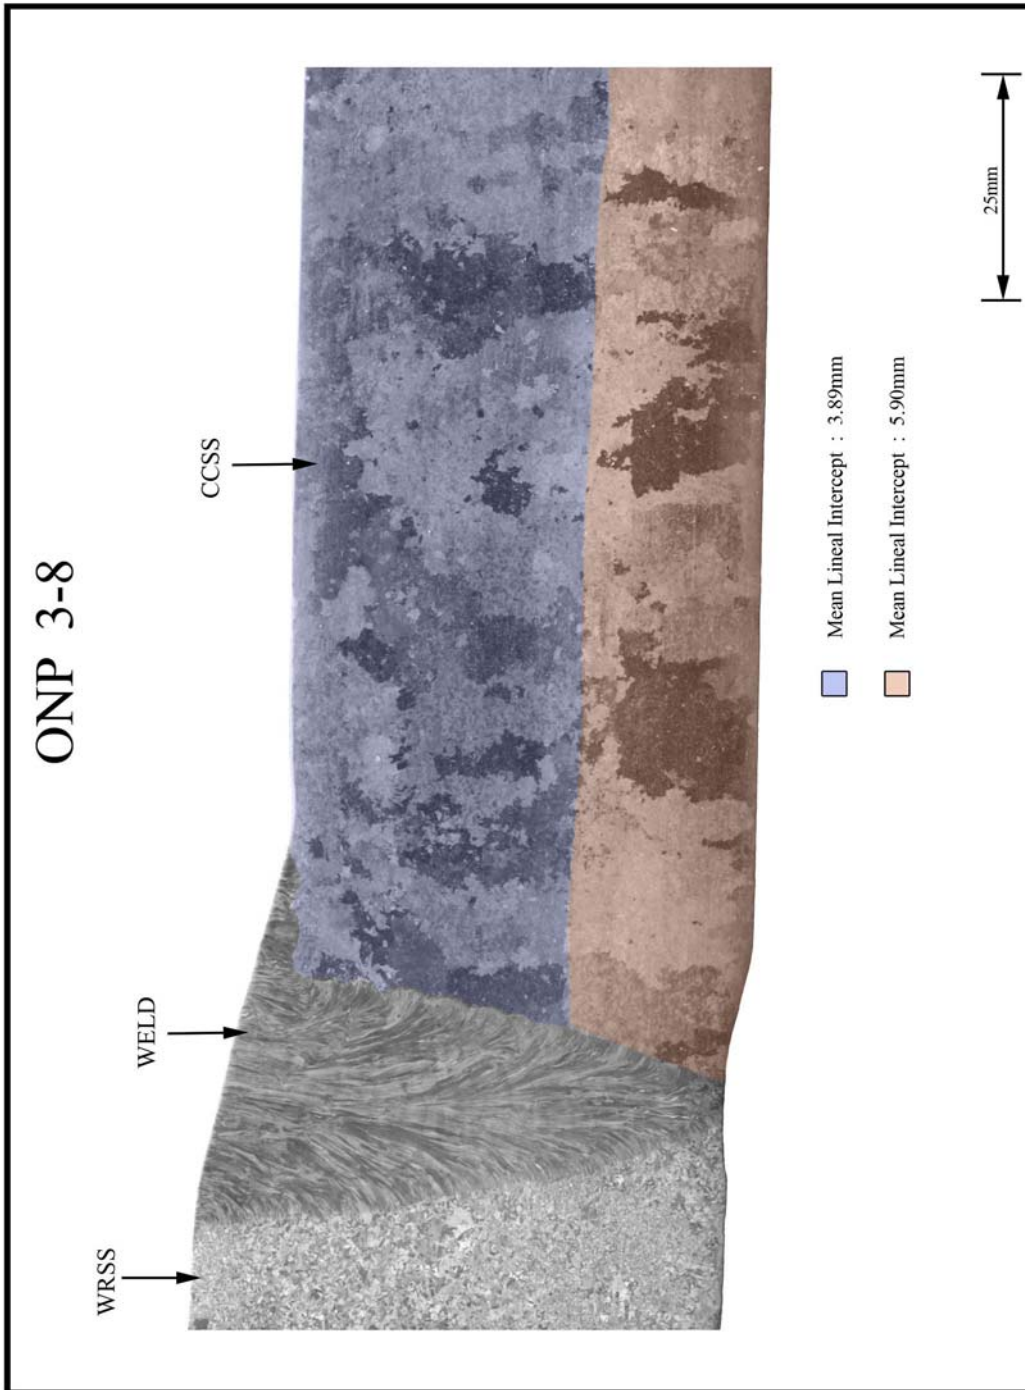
Axial-Radial Cross Section of WOG Specimen ONP-3-8, Showing Outside and Inside Diameter Geometry, and Grain Size, Typical of ONP Configuration
